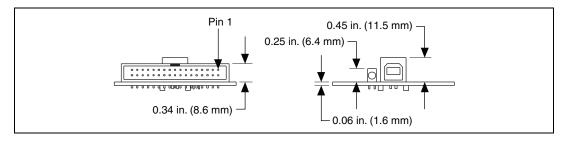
USB-8451 OEM Dimensions (Front and Rear Views)
